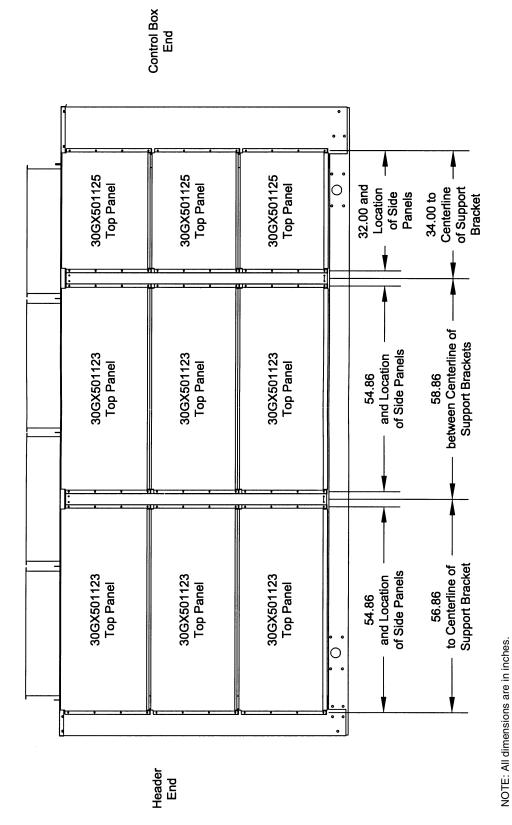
A — Unit Assembly, 30GX080-105, 30GXN,R080, 090 Both Sides
